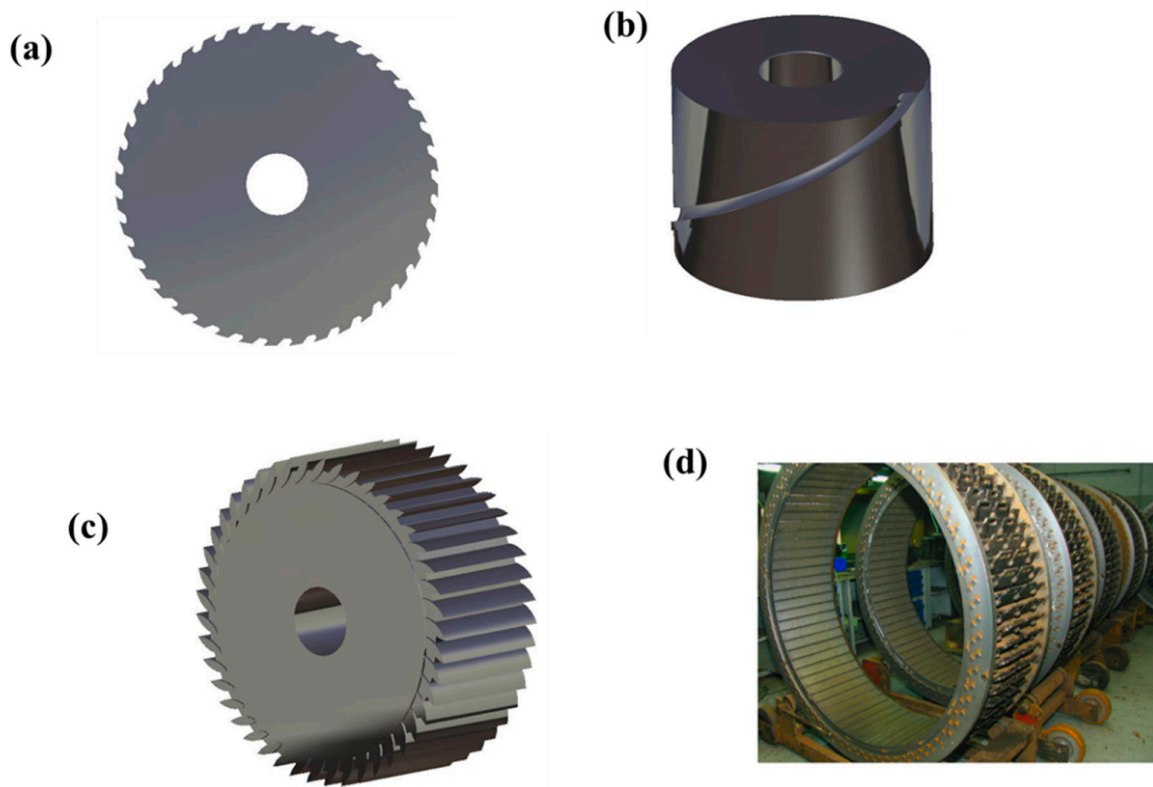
Wood machining tools: (a) Saw (for wood sawing); (b) Milling cutters (for wood milling); (c) Planer head (for wood planing); (d) Drum chipper (for chipping of wood composites) [6,49].
